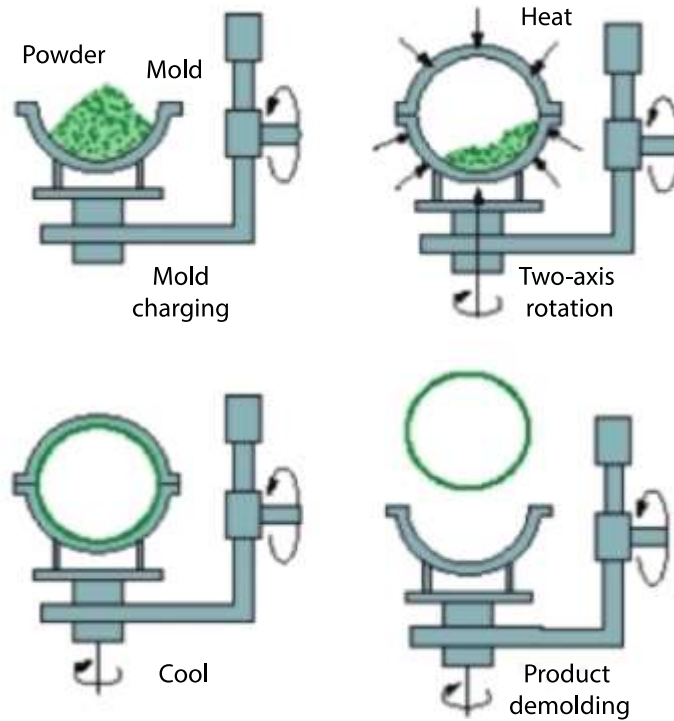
Rotational molding process, reproduced from (www.sarmi-rotomolding.com)
